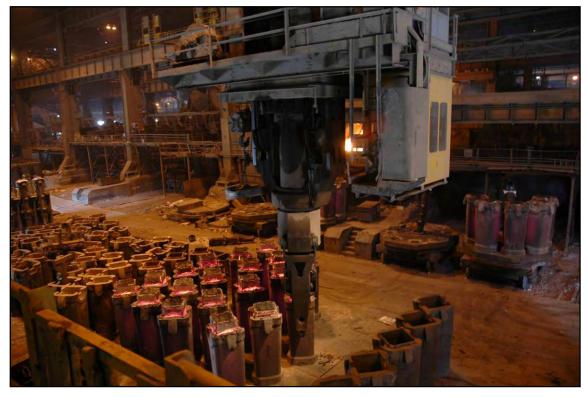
On cooling, an overhead crane is used to move the moulds and the stainless steel ingots are removed
